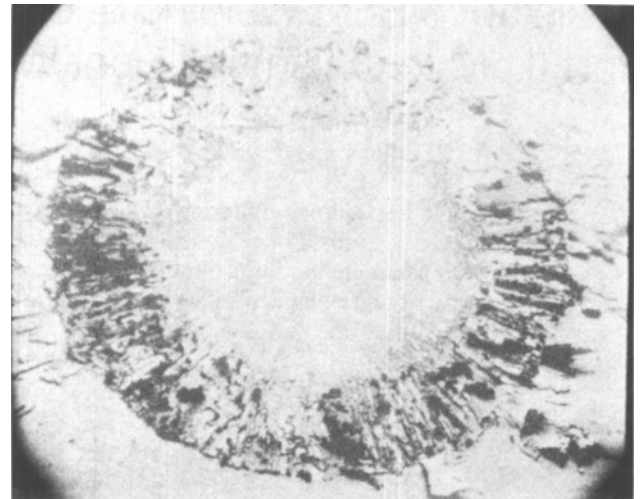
Electrode interface after 3 cycles of a weld which forms the minimum acceptable nugget in 12 cycles showing that the zinc coating at this interface is not yet molten.
